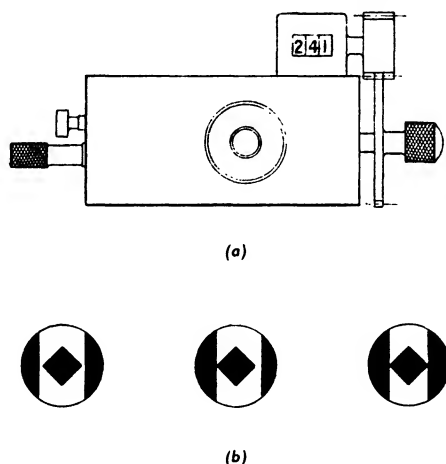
MEASUREMENT OF THE IMPRESSION MADE BY A VICKERS HARDNESS TESTING MACHINE
